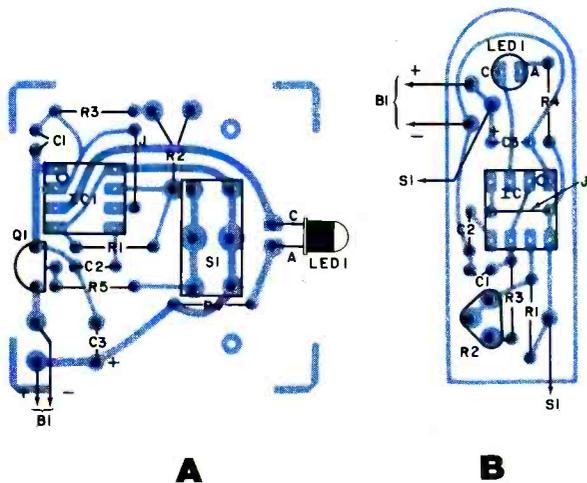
Parts placement guides for the box-style (A) and gun-style (B) infrared transmitters.
